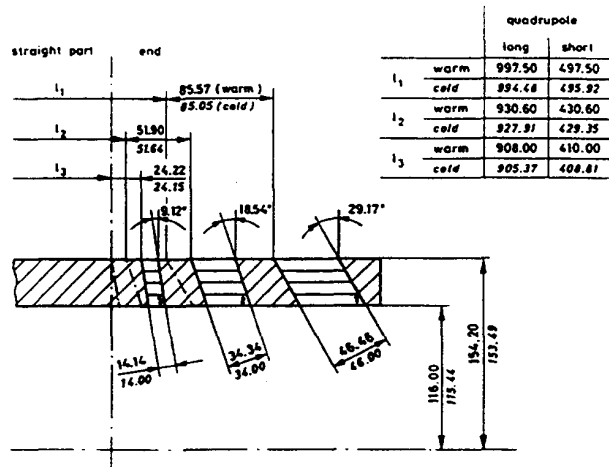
ISR quadrupoles: coil-end cut along the 45° plane with warm and cold dimensions [13]
